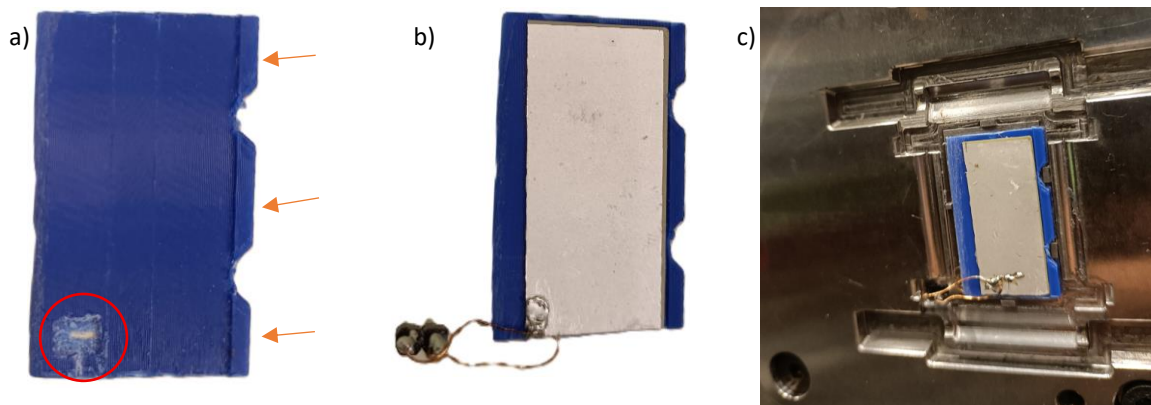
a) 3D printed part, b) piezo with its electrical connections together with the 3D printed part, c) set inserted on the mould
